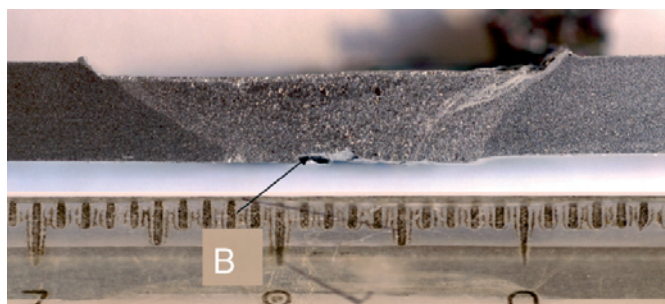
Macroscopic aspect of weld - v = 120 mm/min
